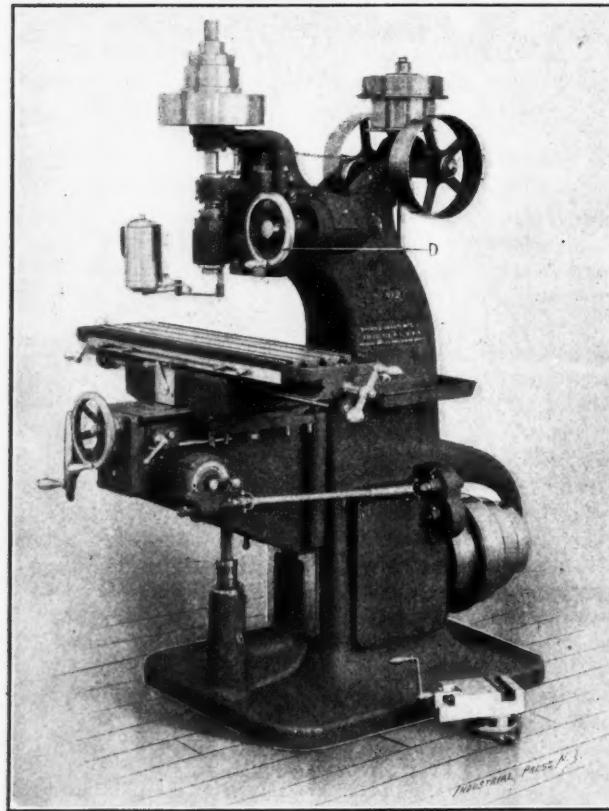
Brown & Sharpe Vertical Milling Machine.
